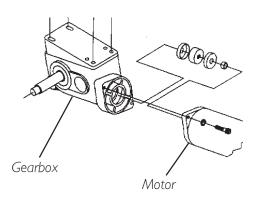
REMOVING/ INSTALLING GEARBOX
